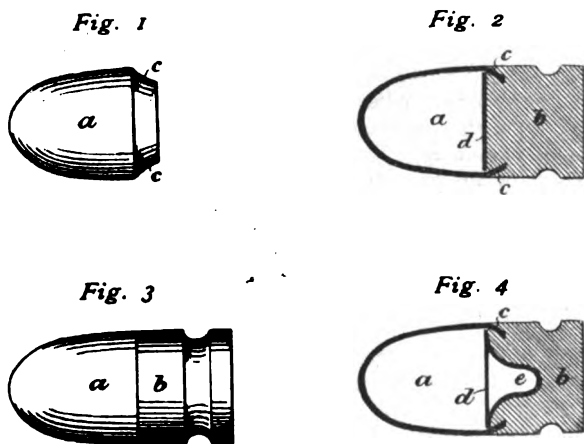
is a view of the bullet with cap complete. Fig. 4 is a sectional view showing the lead reduced in order to lighten the bullet.
